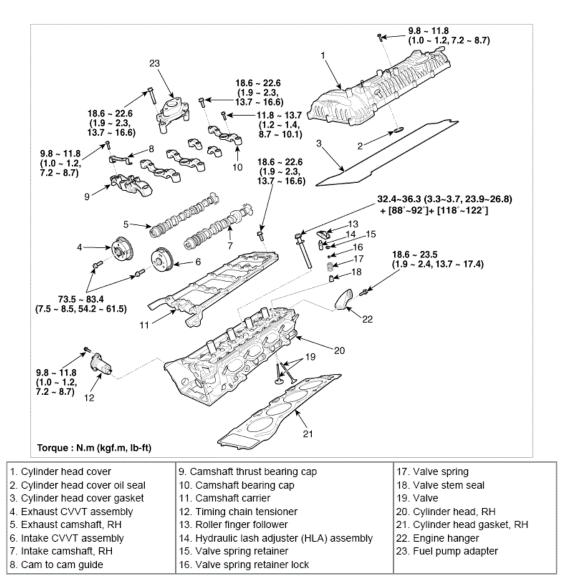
Identifying Cylinder Head Assembly Components With Torque Specifications (RH) Courtesy of HYUNDAI MOTOR AMERICA
